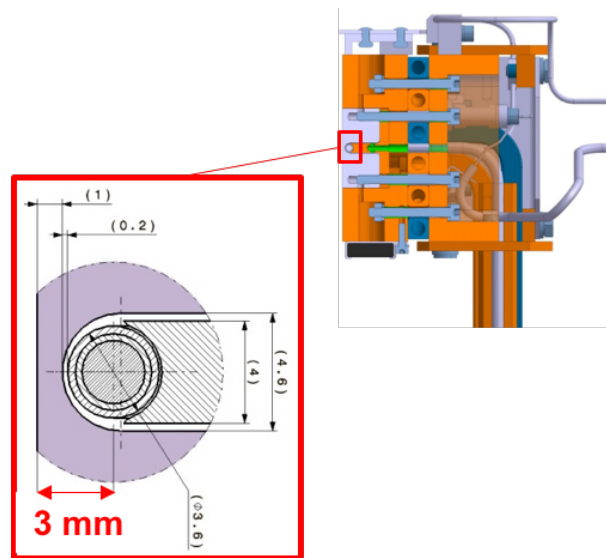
Top view of the wire in collimator prototype, courtesy of F. Carra [12]. It is important to note that the wire center is shifted by 3 mm with respect to the surface of the jaw.
